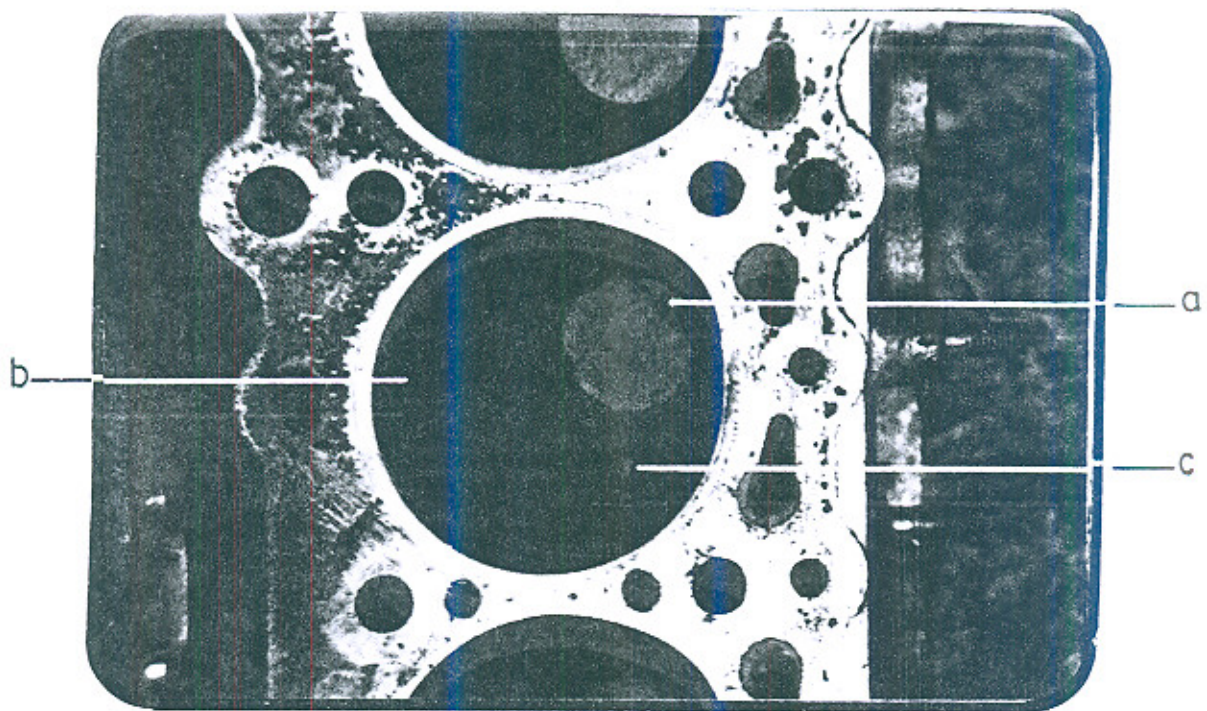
COMBUSTION CHAMBER CYLINDER No.3
